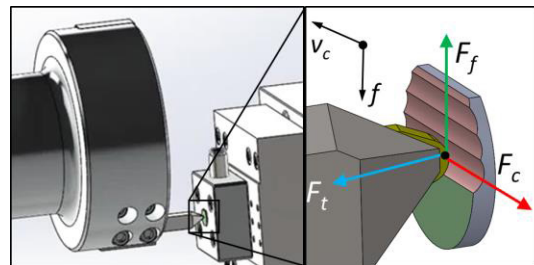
Flycutting setup showing a closer look at the tool/workpiece interaction with force directions
